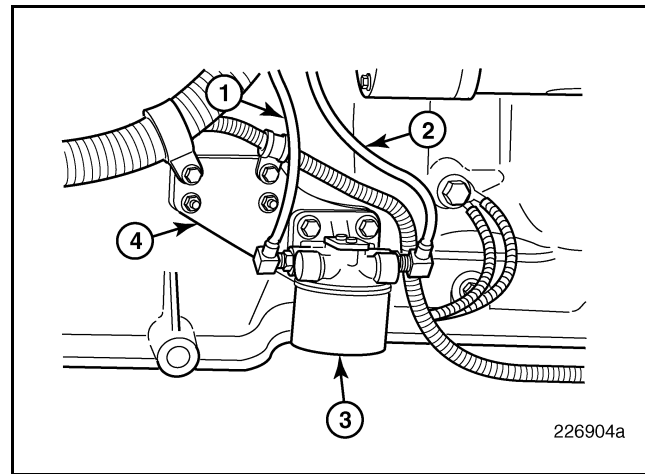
Oil Coalescing Air Filter Assembly Removal
